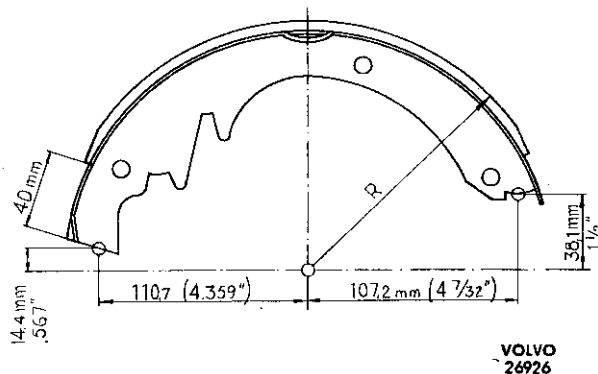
Adjusting measurement for brake shoe, front wheel.
